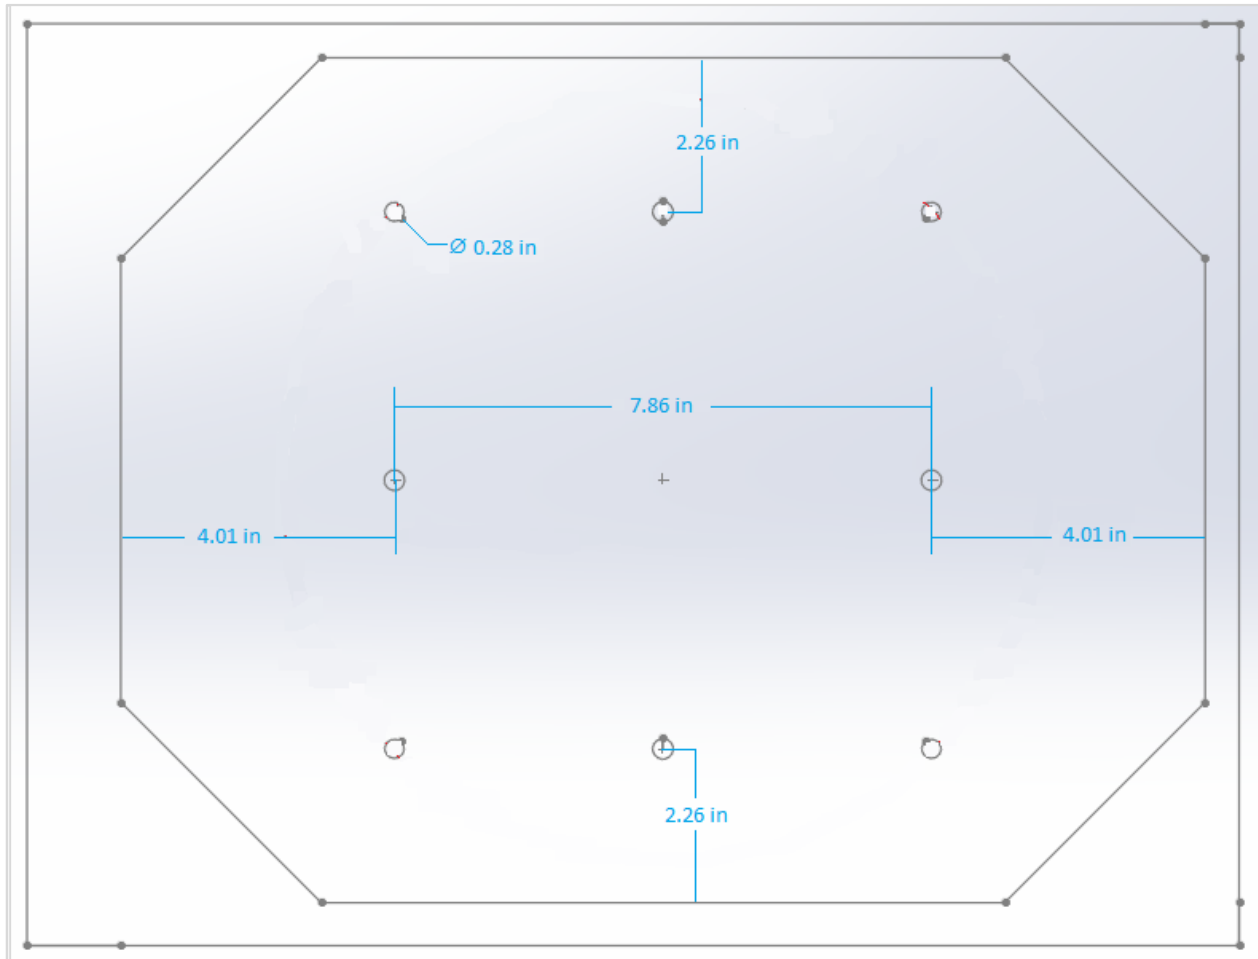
Anticipated HASP mounting plate modifications. Eight holes will be drilled, forming a 7.86" x 7.86" square. Holes will be 0.28" in diameter. Holes on the port and starboard sides are 2.26" away from the keep out area, while holes on the bow and stern sides are 4.01" away.
